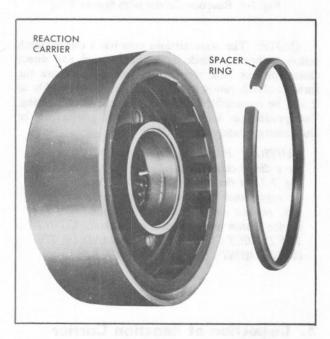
Reaction Carrier with Spacer Ring (Eldorado)
